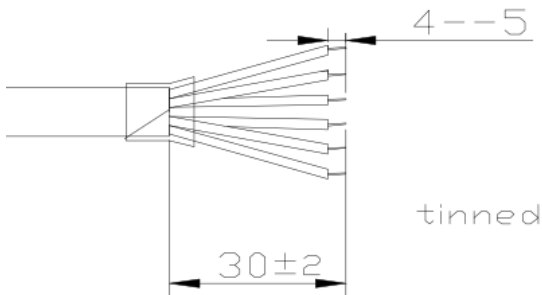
USB-RS232-WE Mechanical Details (dimensions in mm)
